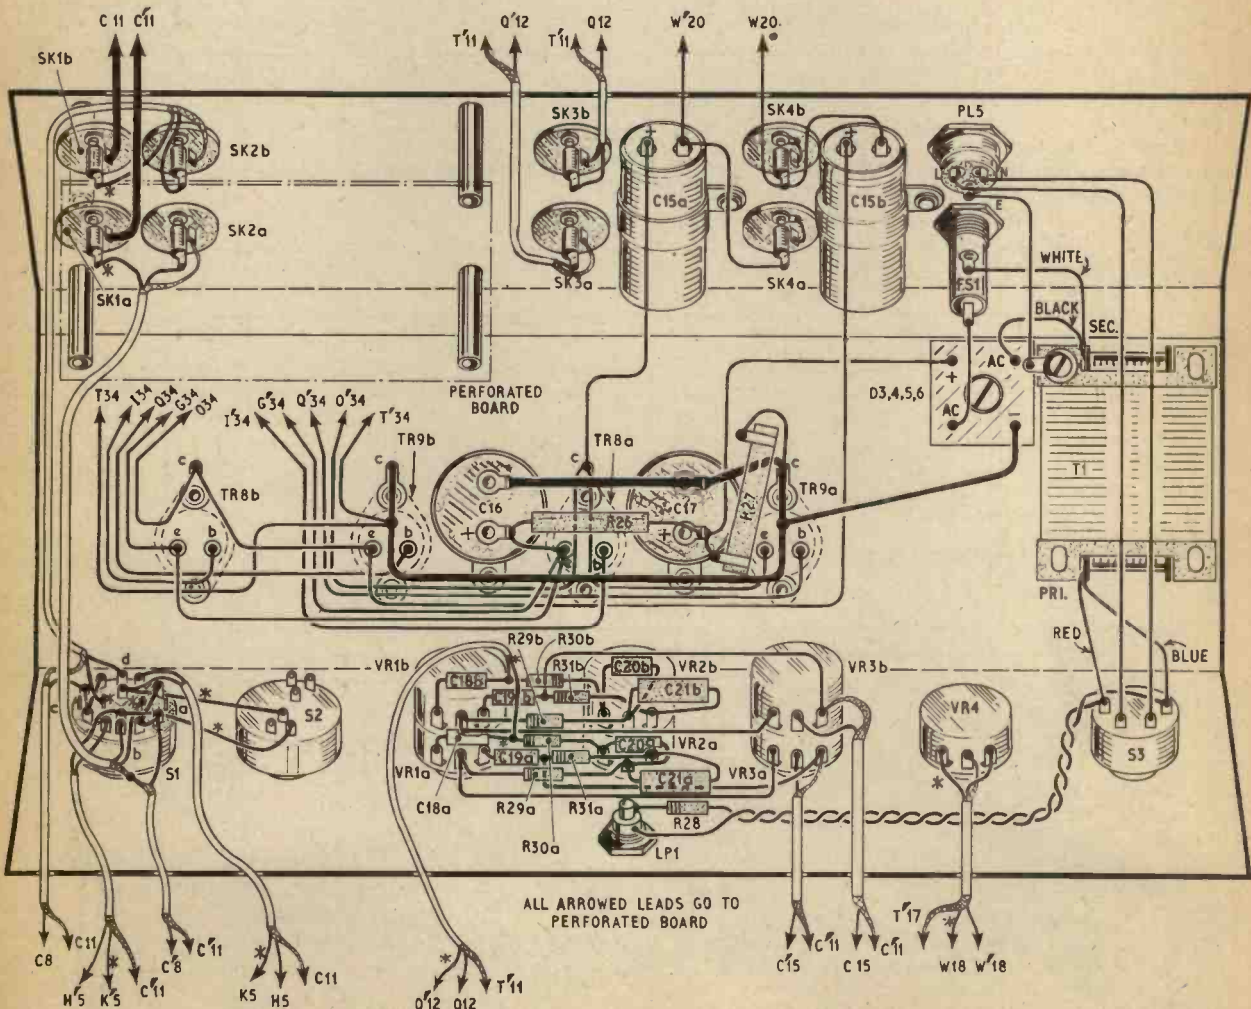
The wiring of the base and front panel piece (Section 1) and that of the rear panel (Section 2), and assembled into one unit. Asterisks are shown to identify twin leads. Arrowed code numbers relate to perforated board locations (see Fig. 5 last month). For exact position of board see photographs. Observe thick 12 s.w.g. wires
